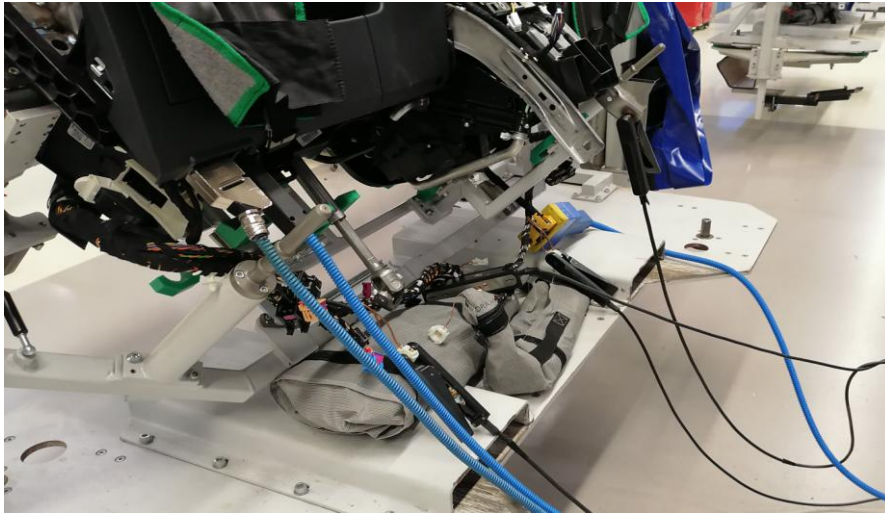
cockpit during the ECOS testing (with plugged connectors)
